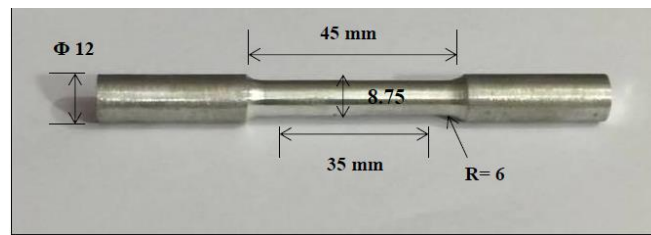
Profile and, dimension of tensile test samples in (mm) using ASTM standard (A370-11)
